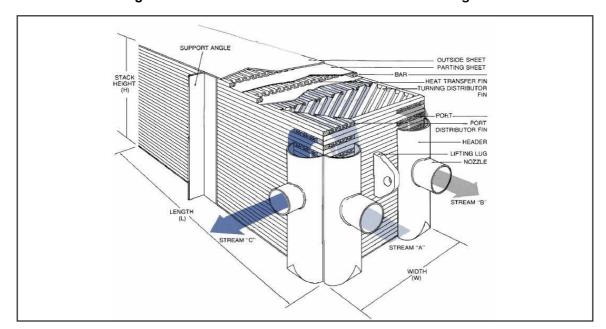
Brazed Aluminium Plate-Fin Heat Exchanger
